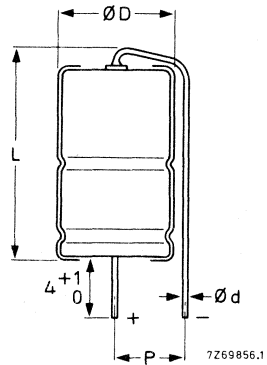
Style 3; see Table 1 for dimensions d, D, L and P.
